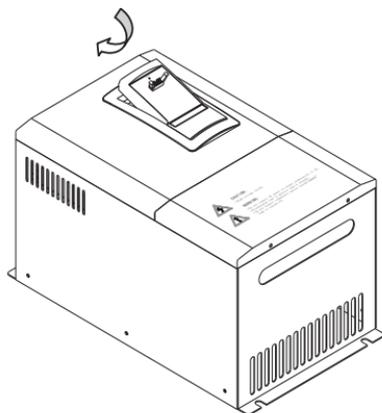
Mounting Diagram for the operator panel and connecting wire of the inverter Model B
